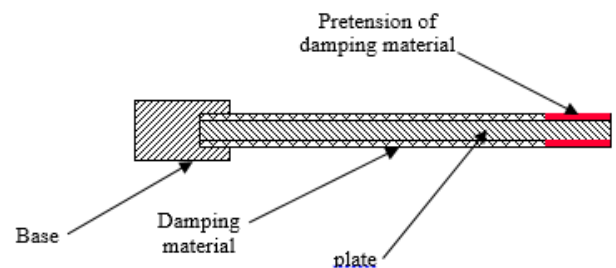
PLAIN PLATE WITH PRETENSION LAYER ASSEMBLY
